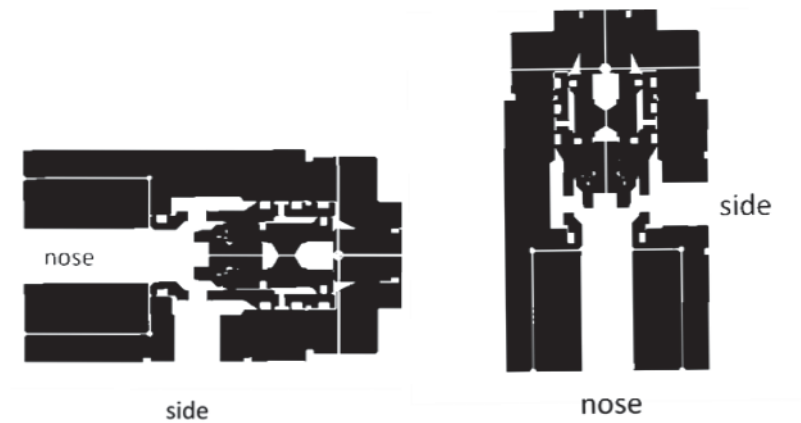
Sectional views at mid-section of the housing shown in Figure 2.3
